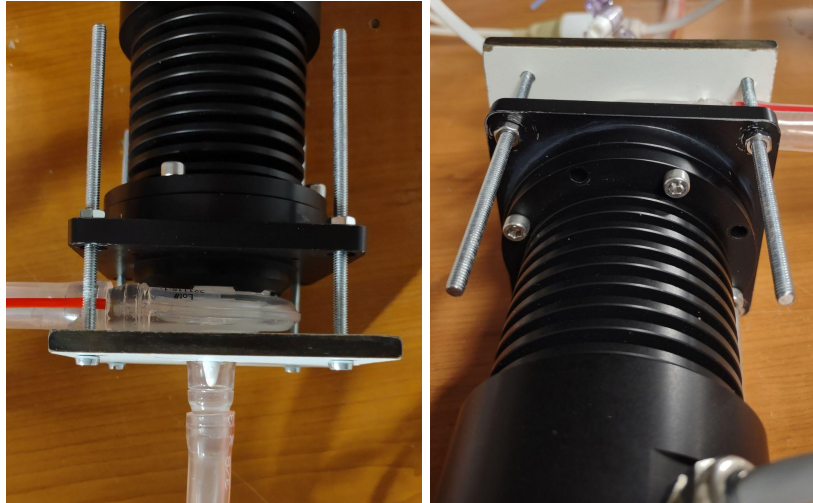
Clamp setup holding the clamped pump samples to the electromotor.
